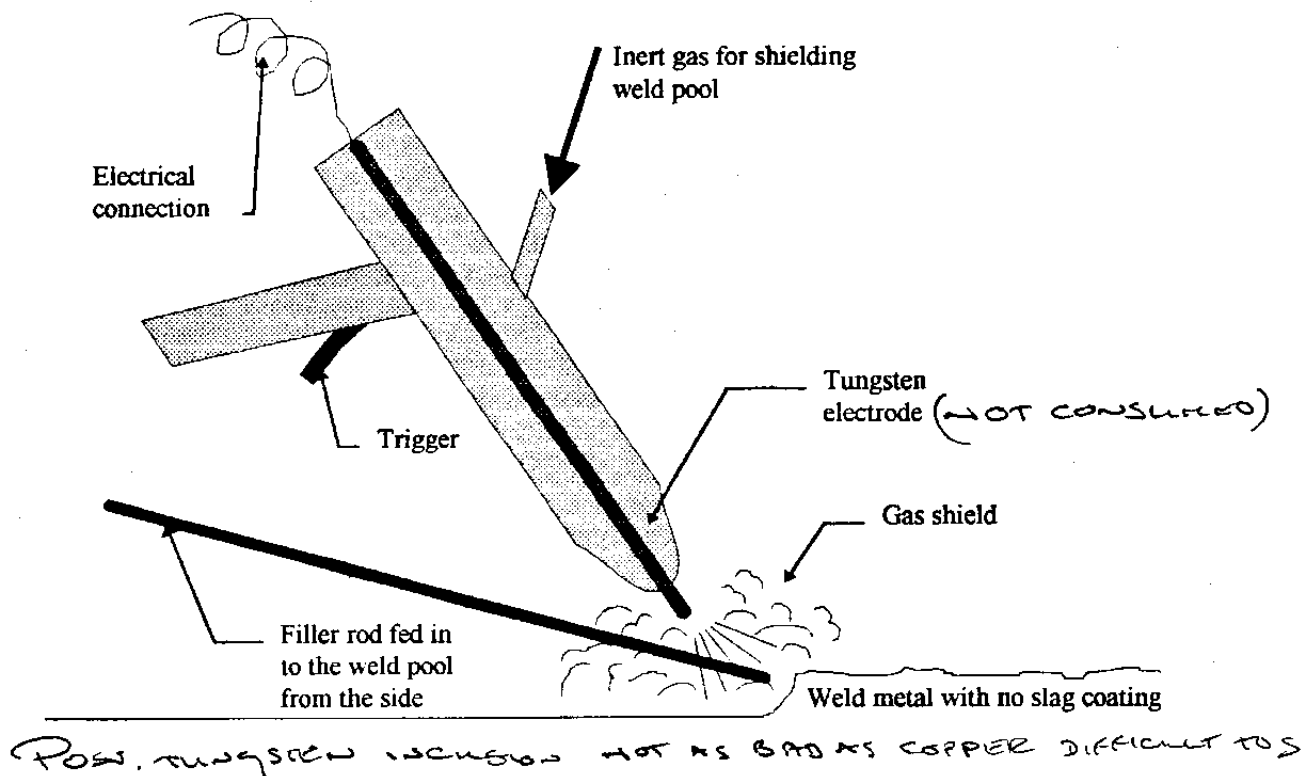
Tungsten Inert Gas (TIG) Welding
